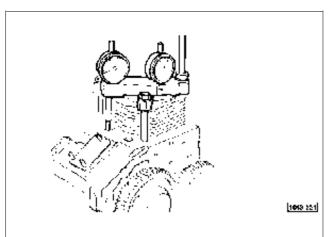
If the timing gear has been removed from the shaft carry out valve timing for timing the engine as indicated on page 75;
